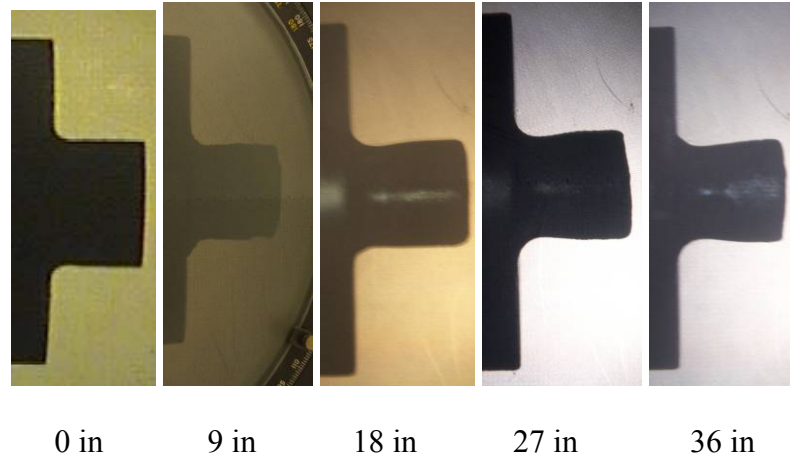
Wear of Trivex tool for butt welding of Al 6061/SiC/17.5p at 1350 rpm and 4 ipm.
